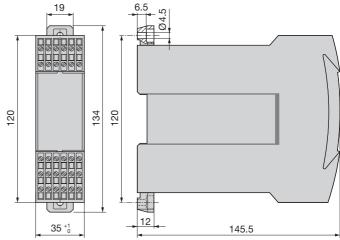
SINEAX VC 603 in housing S35, with the screw hole brackets pulled out for wall mounting.
